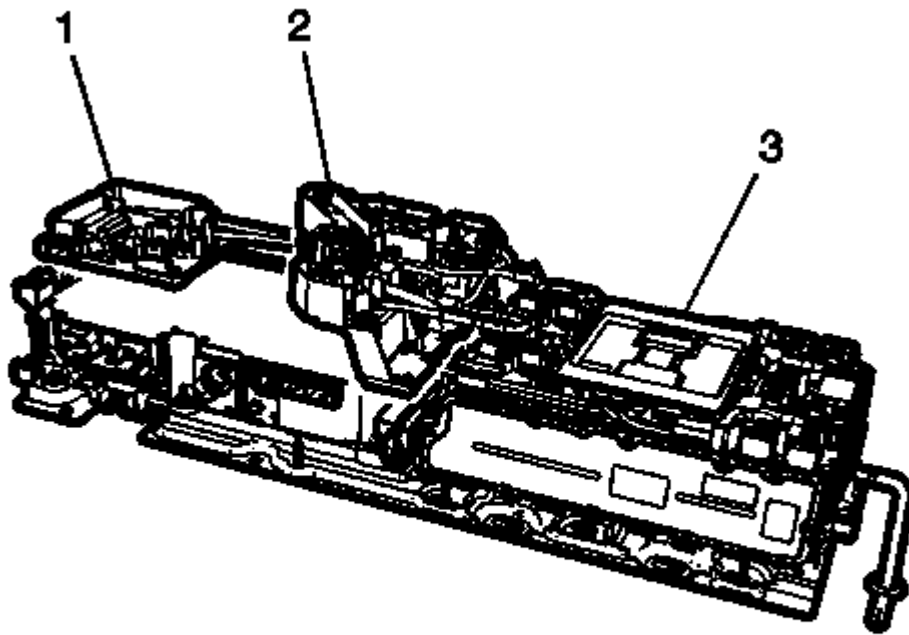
Drive Motor Battery Wire Junction Block Relay
